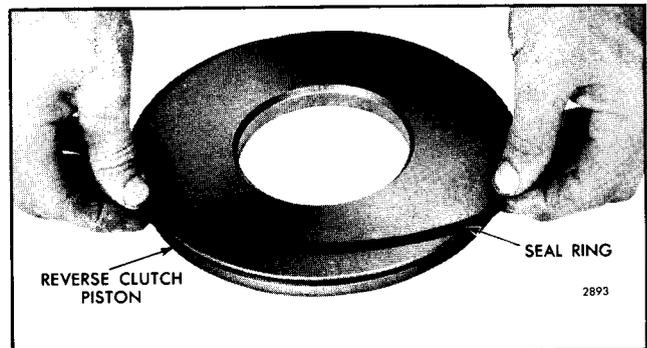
Installing Reverse Clutch Piston Seal Ring on Piston
